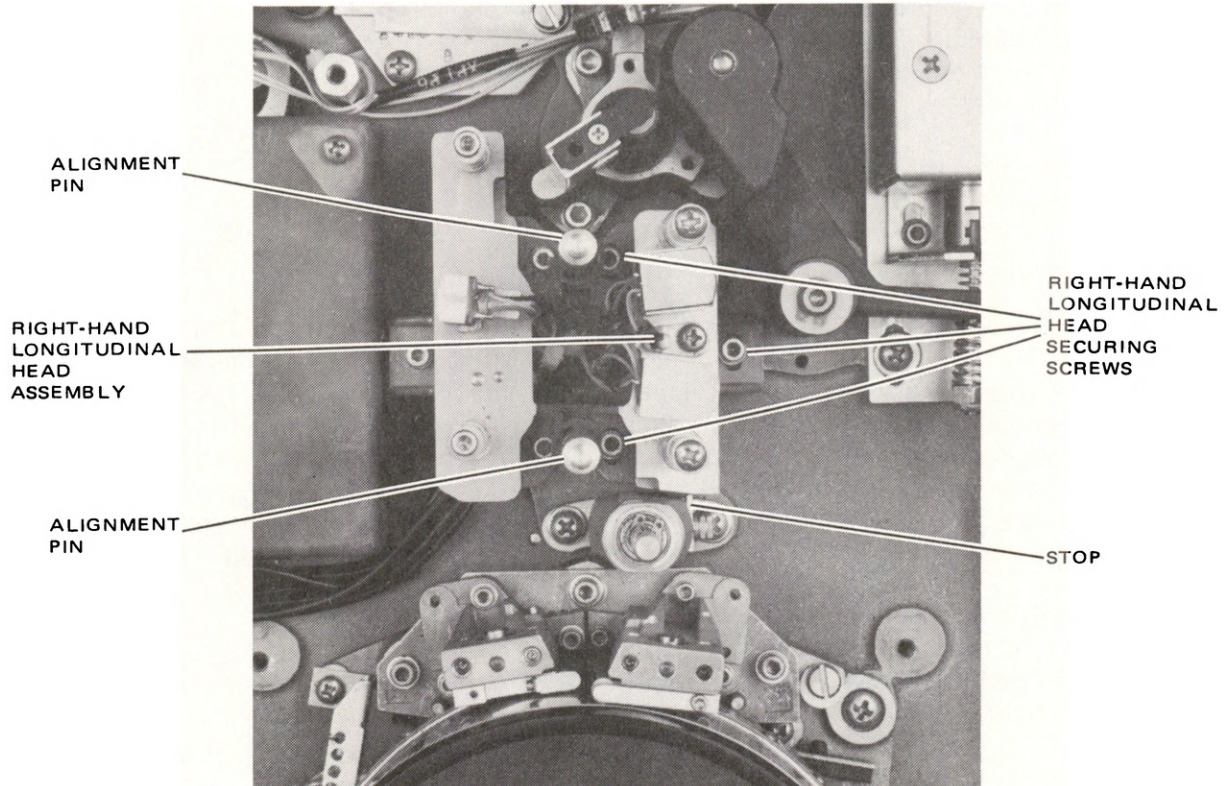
Longitudinal Head Assembly Securing Screws and Alignment Pins
